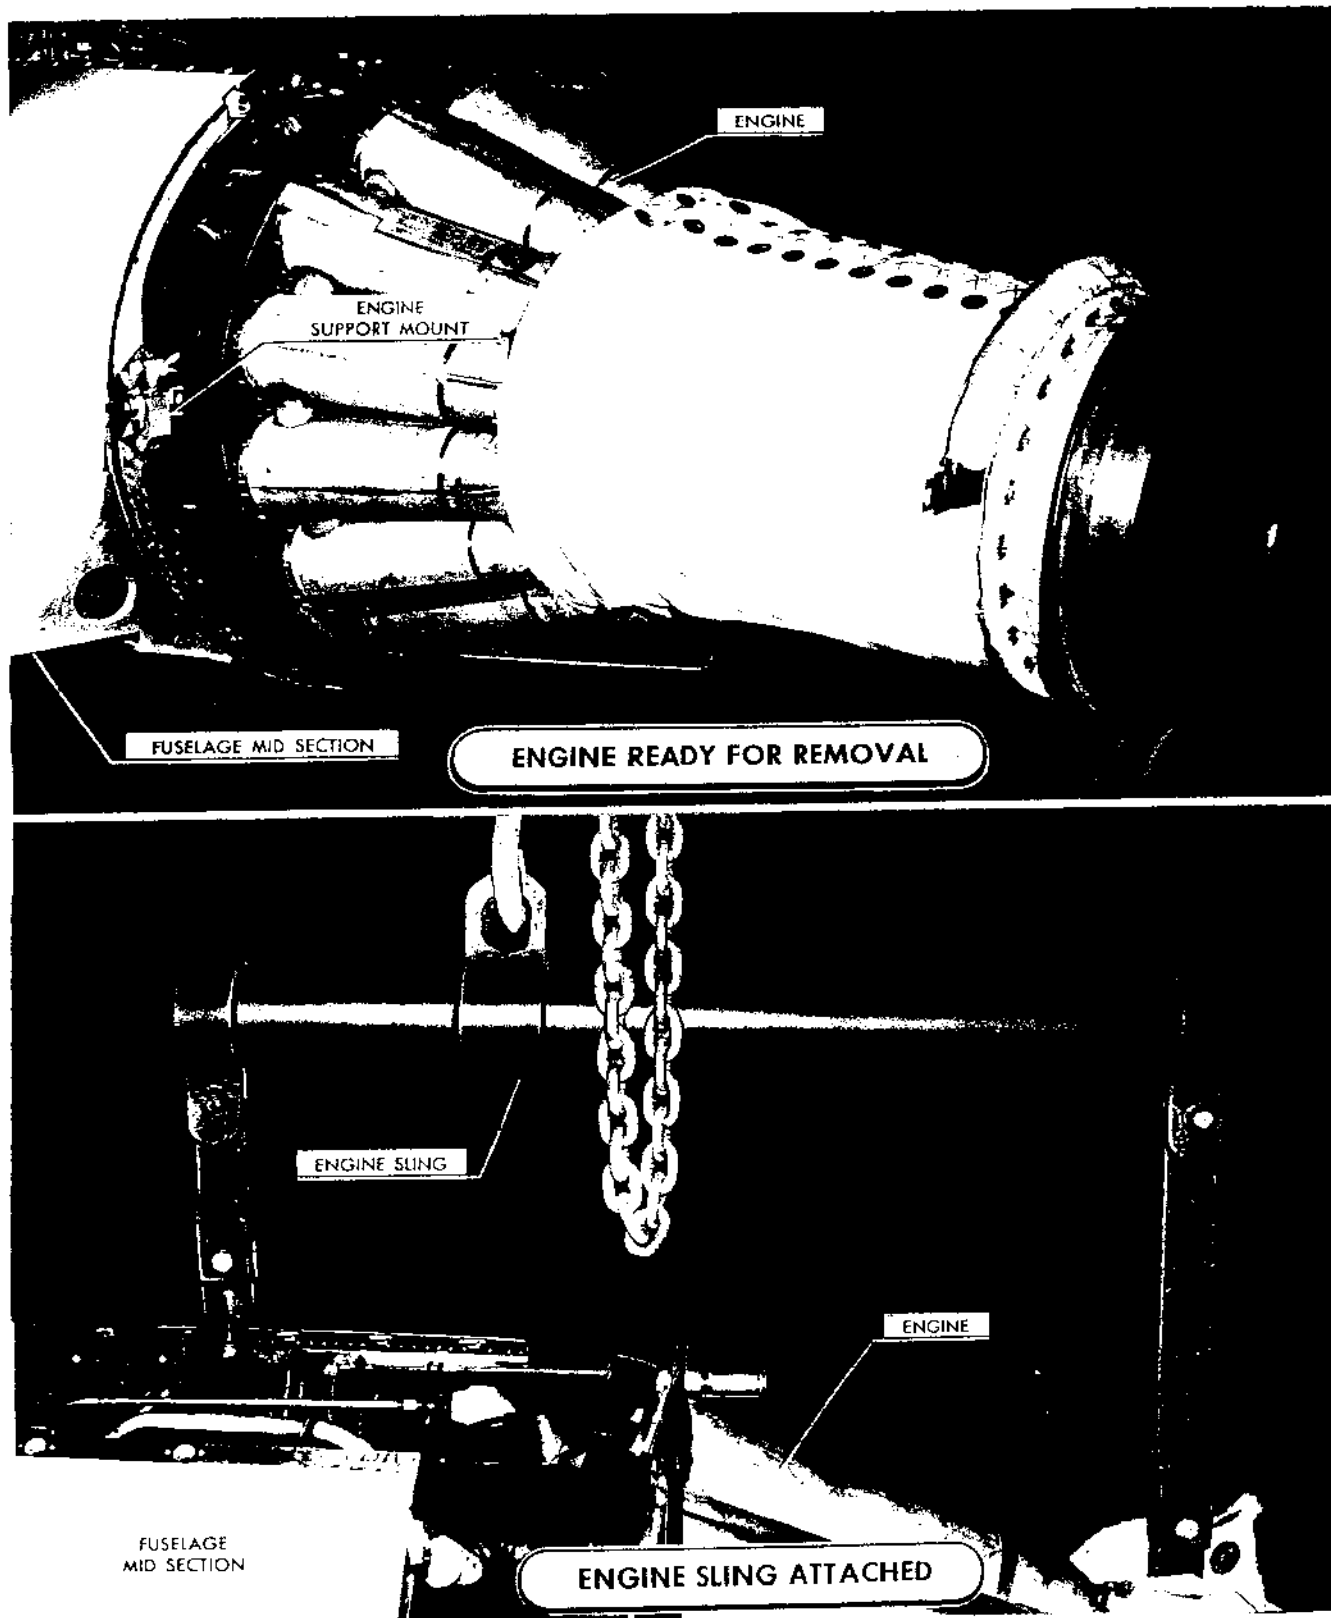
(Sheet 5 of 7 Sheets)—Aft Section and Engine Removal
